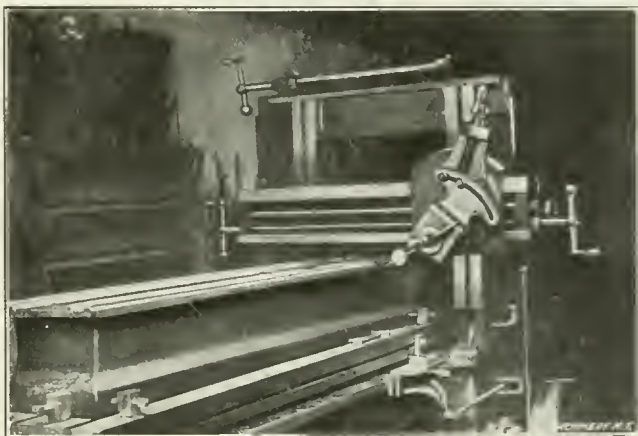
Testing Parallelism of the Outer Edge and Ways of a Lathe with the Test Indicator
